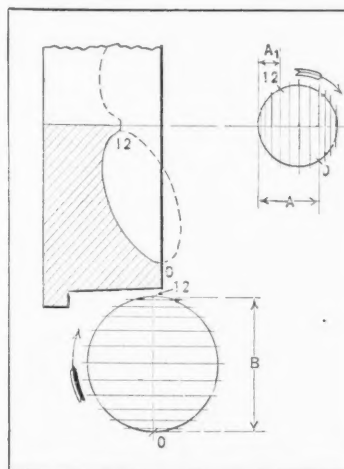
Setting of Crankpins for turning Cavity of Unusual Form
